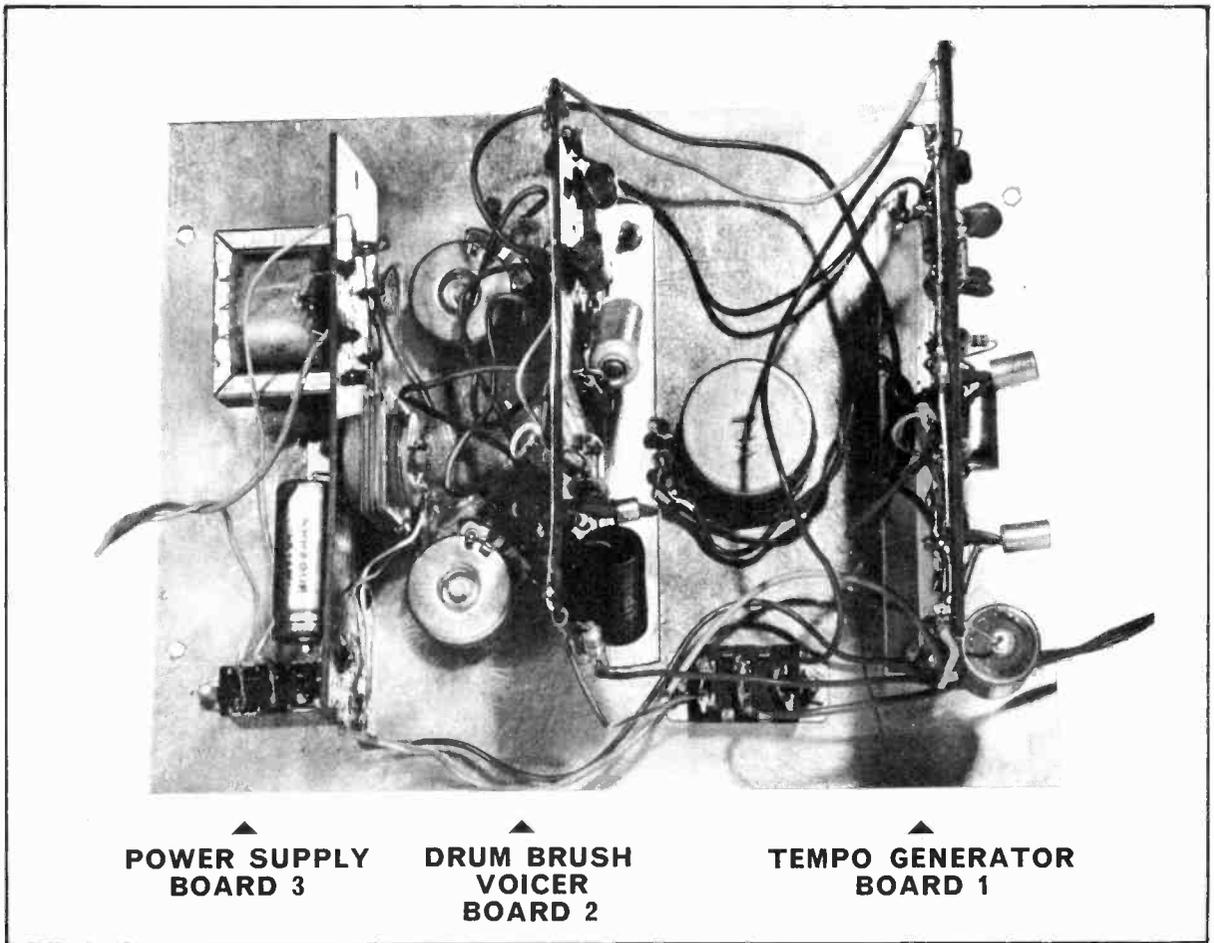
Showing interwiring of boards and controls on front panel. Aluminium angle is used for mounting the boards
